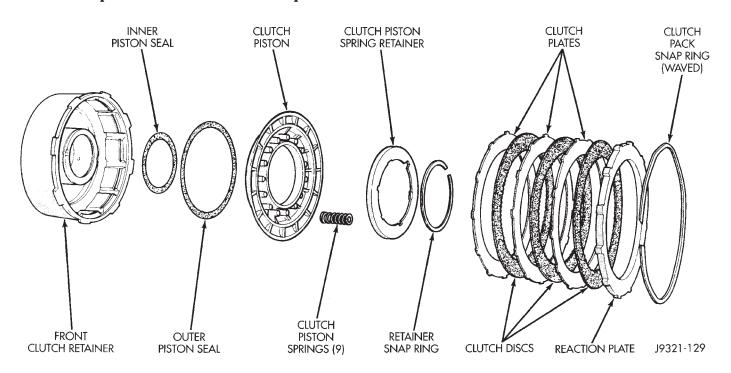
46RH Front Clutch Components (3-Disc Clutch Shown)
